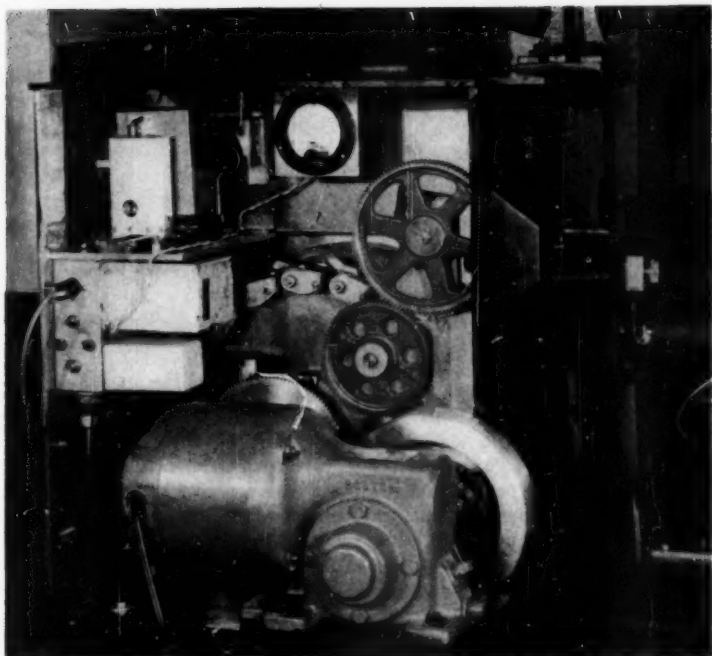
Photograph of mechanism showing stationary cam and cam followers.
